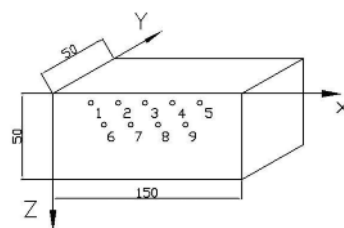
Arrangement of thermocouples embedded in the workpiece
